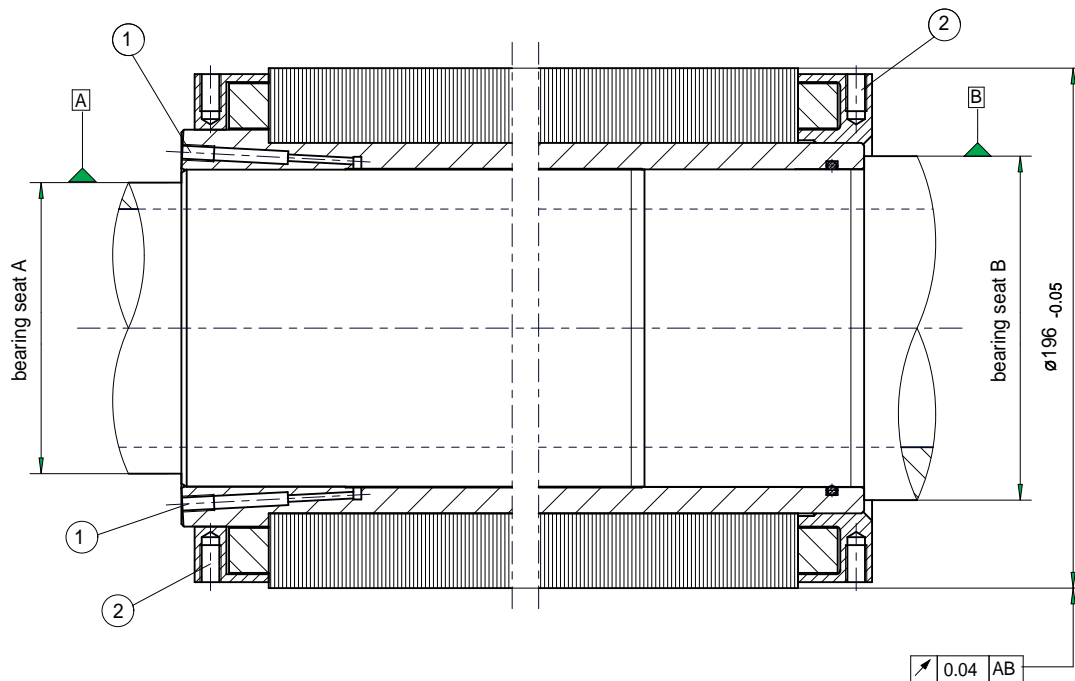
1MB 270 frameless spindle motor - dimensional data (part 2)
